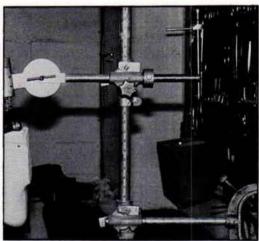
Universal Positioning Arm installed in the Vertical Fabrication Machine with a belowknee socket model held in place as for establishment of bench alignment and distal buildup prior to vacuum forming. The two locking rings insure that changes in rotation will not lead to inadvertent linear changes.
